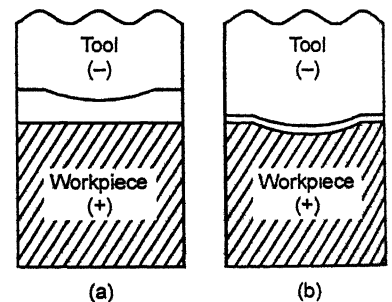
The principle of ECM process (a) Shape of workpiece before machining; (b) Tool shape is reproduced on workpiece after ECM.
